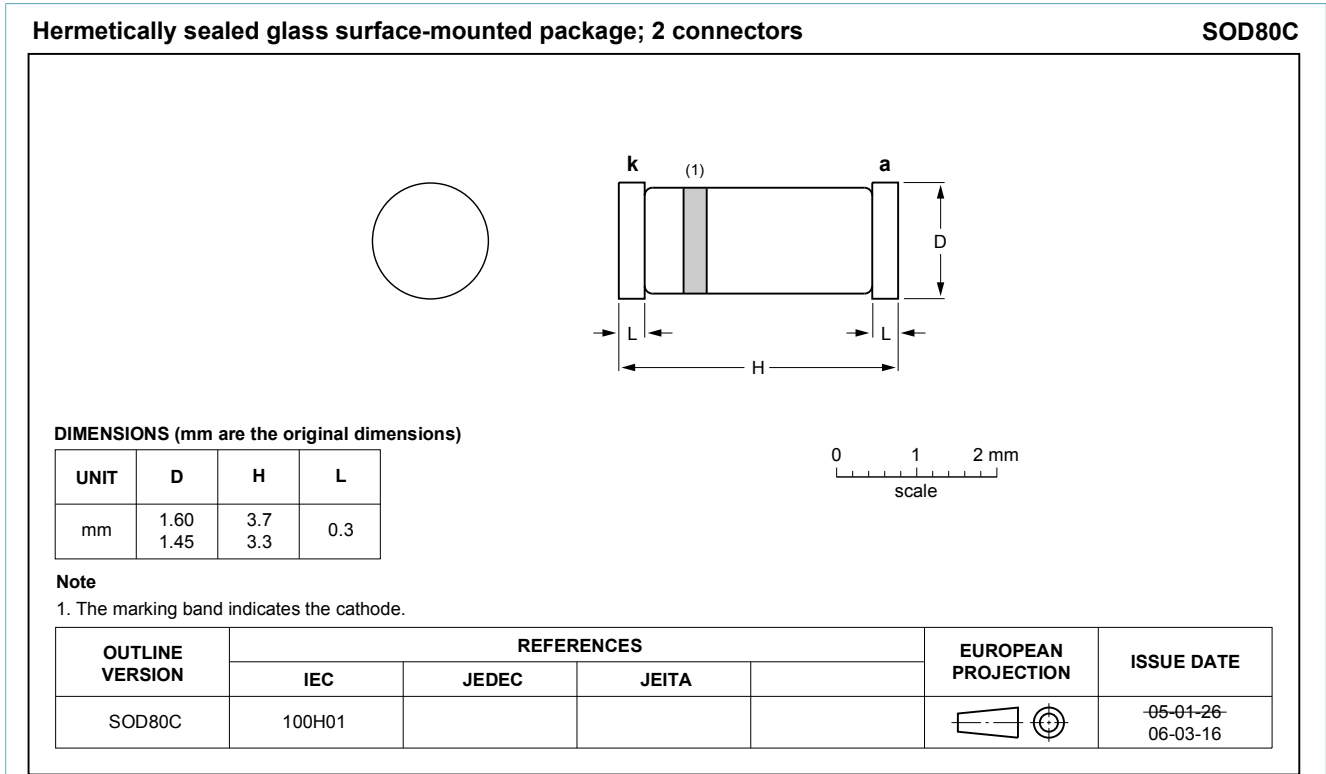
Package outline LLDS; MiniMelf (SOD80C)
